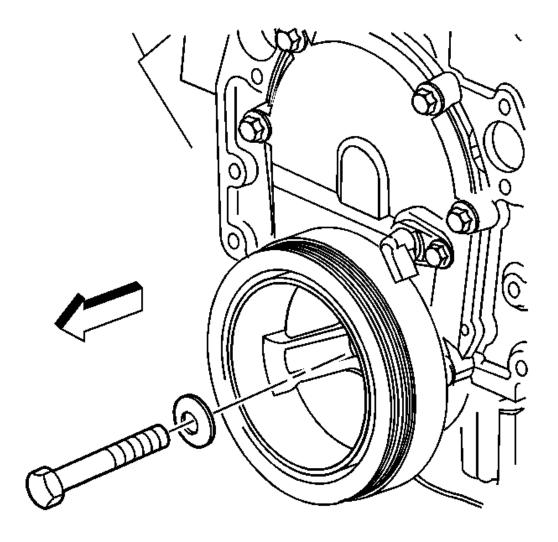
View Of Crankshaft Balancer Bolt & Washer Courtesy of GENERAL MOTORS CORP.
